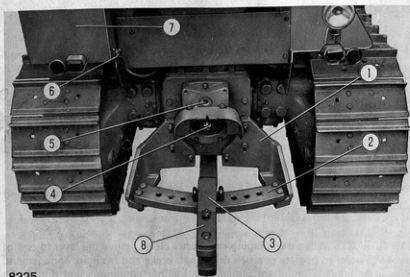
Towing Device, D.T.O. and P.T.O.
